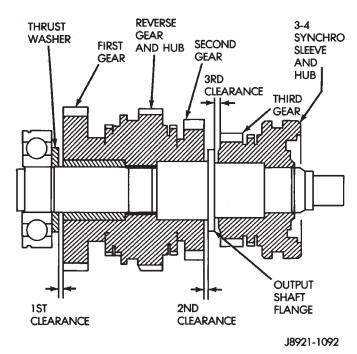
Checking Output Shaft Gear Thrust Clearance
